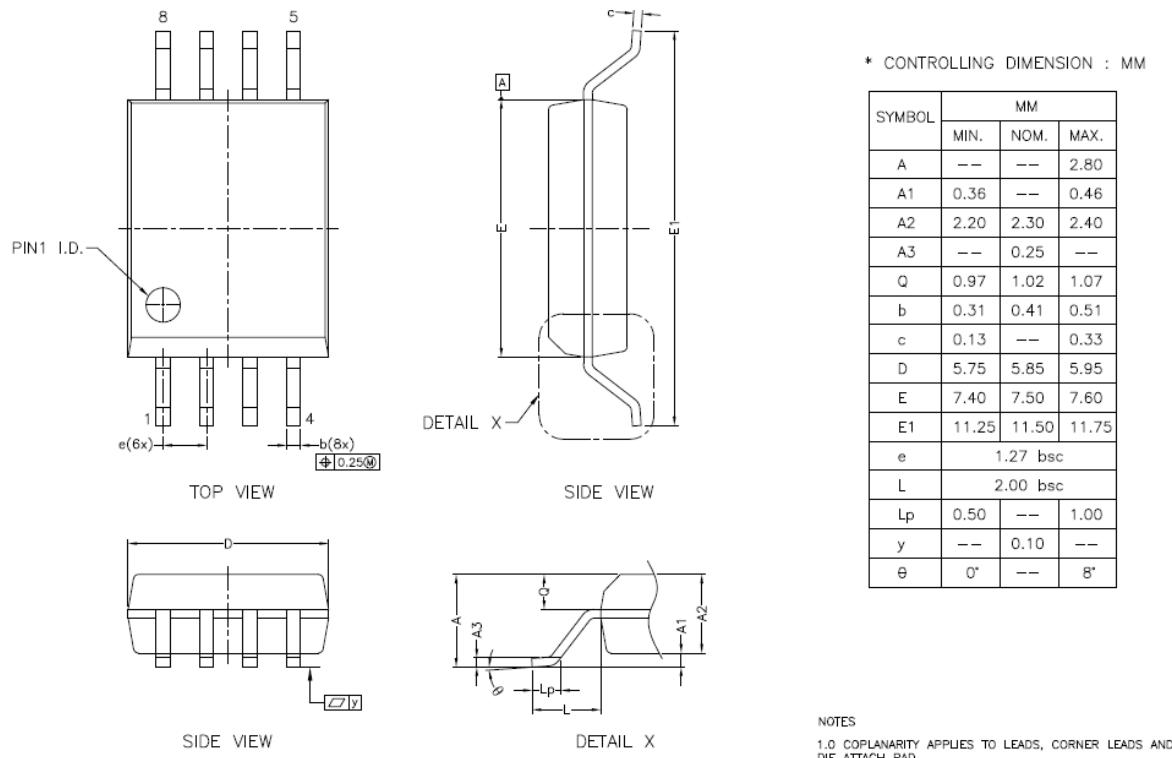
SOW8 Package Shape and Dimension in millimeters
